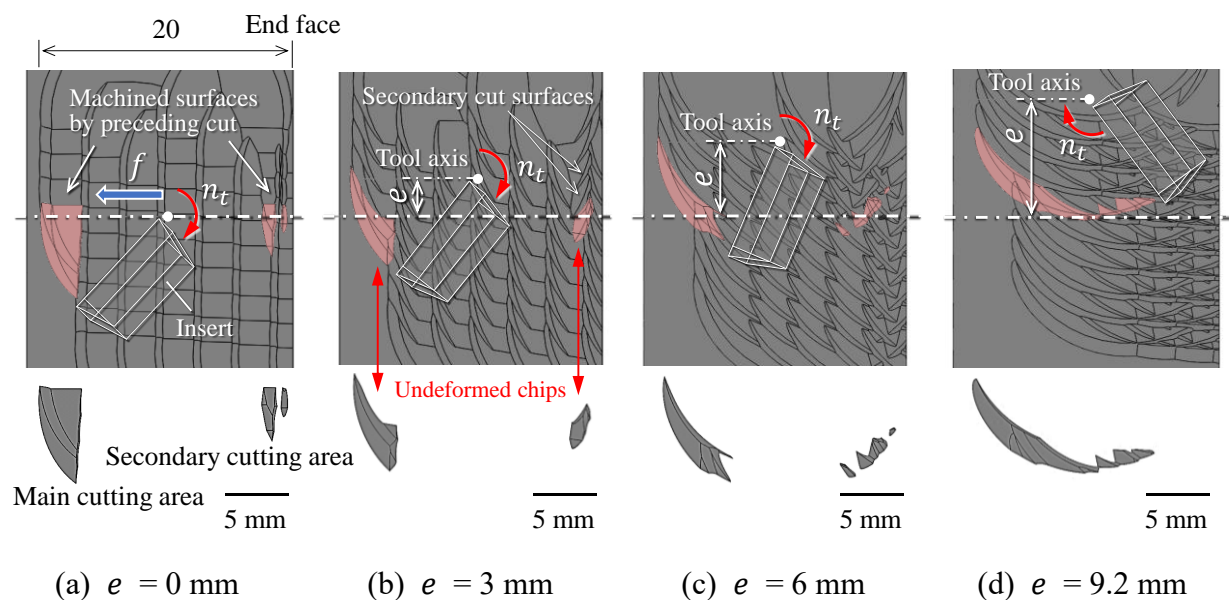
Surface texture of machined surfaces and corresponding undeformed chip shape in each tool axis offset.
